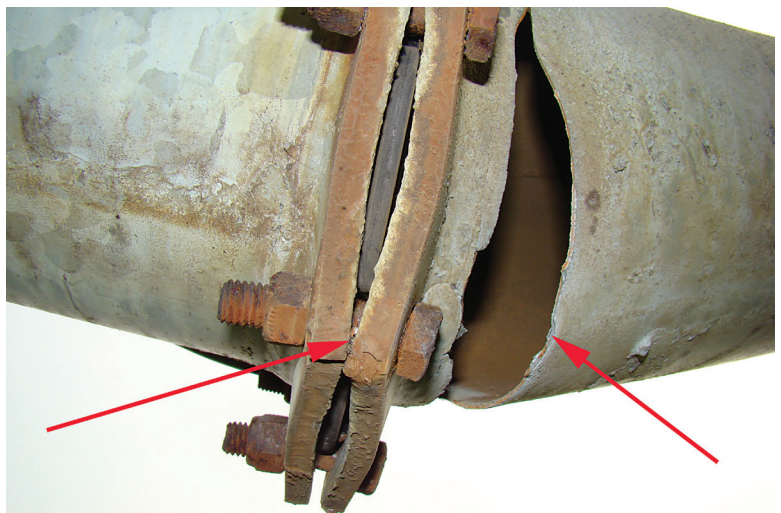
Close-up of the failure origin showing ductile fracture at the lower area of the pipe with an origin approximately at the right arrow, just outside the weld fillet.
